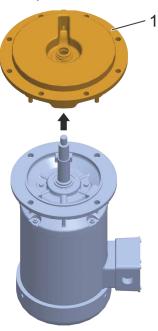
Removing the intermediate casing (example: herborner.F-N)
